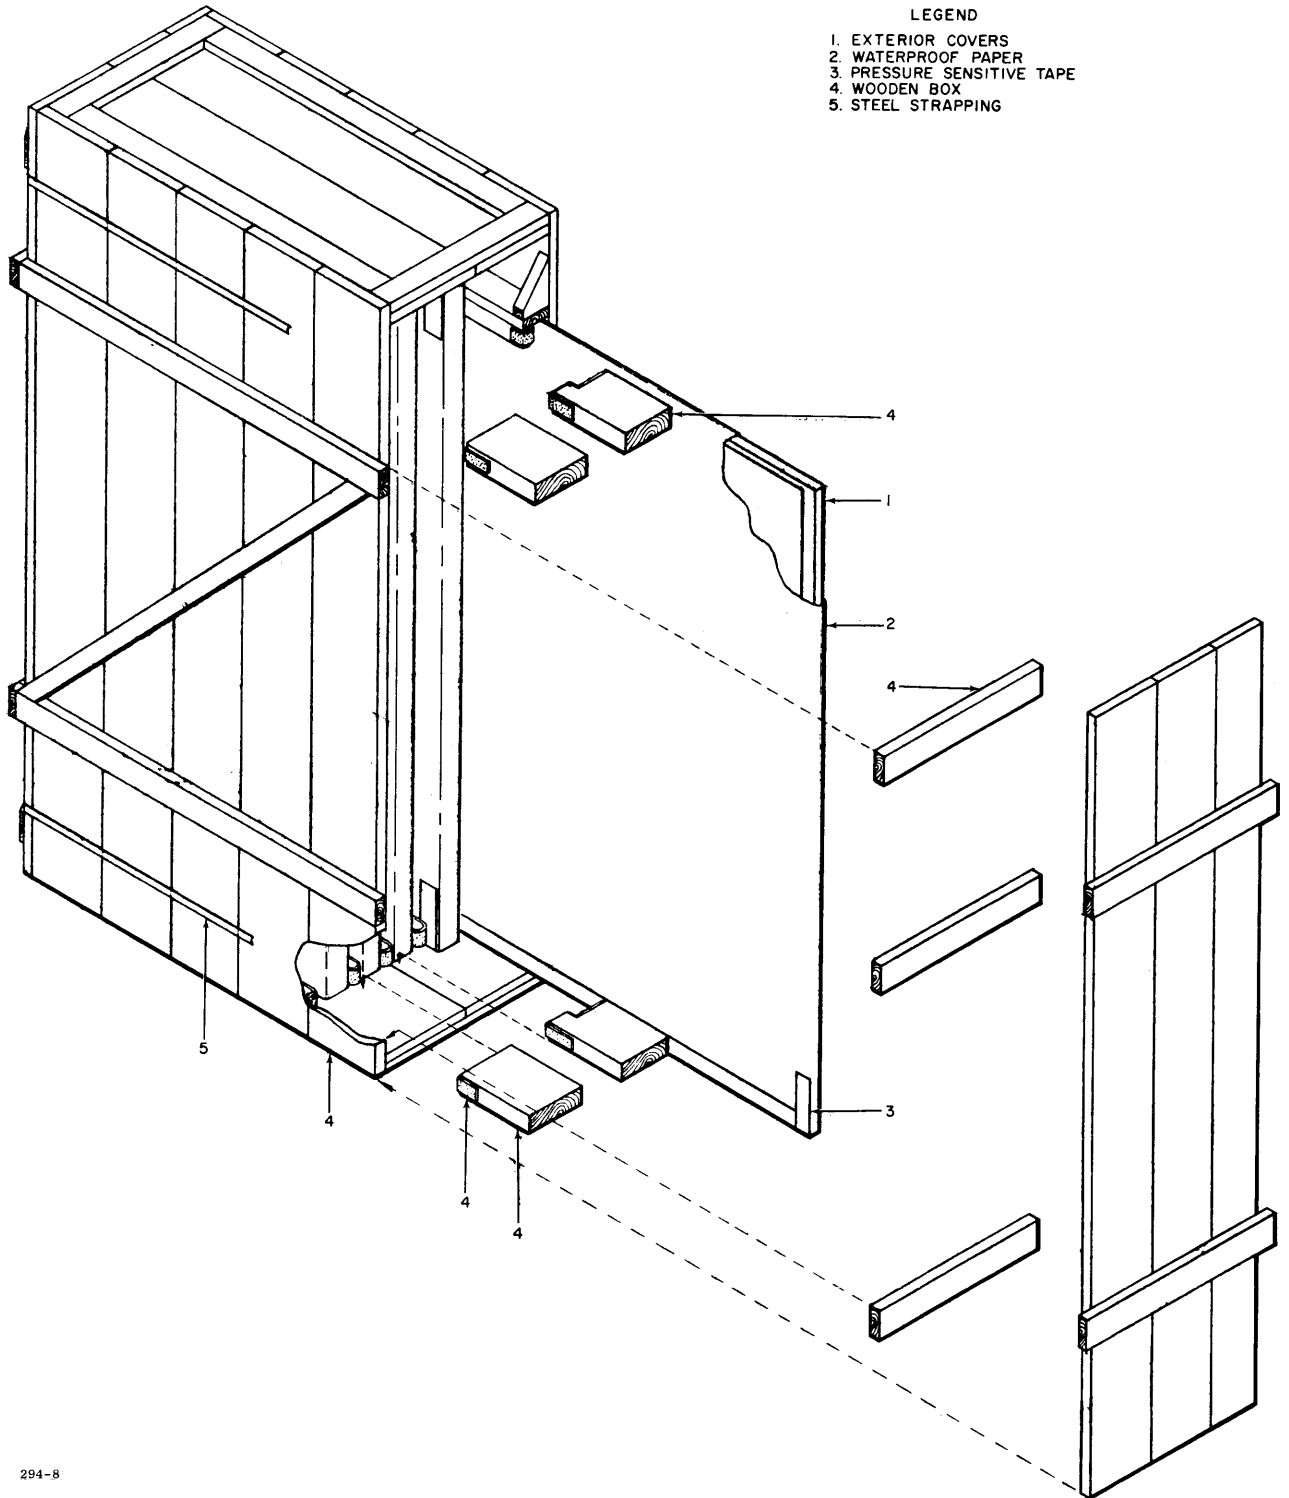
Typical Equipment Packaging (sheet 3 of 5)
